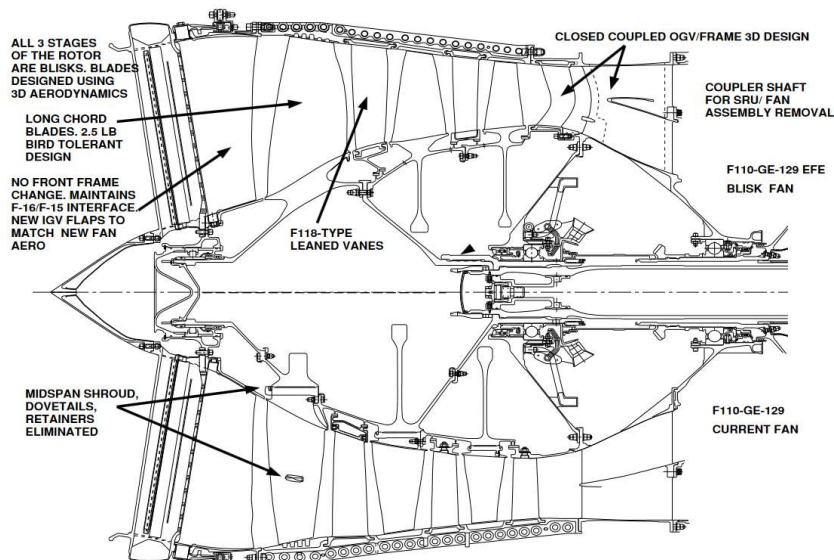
Blower section of F110-GE-129 turbofan engine[3].
